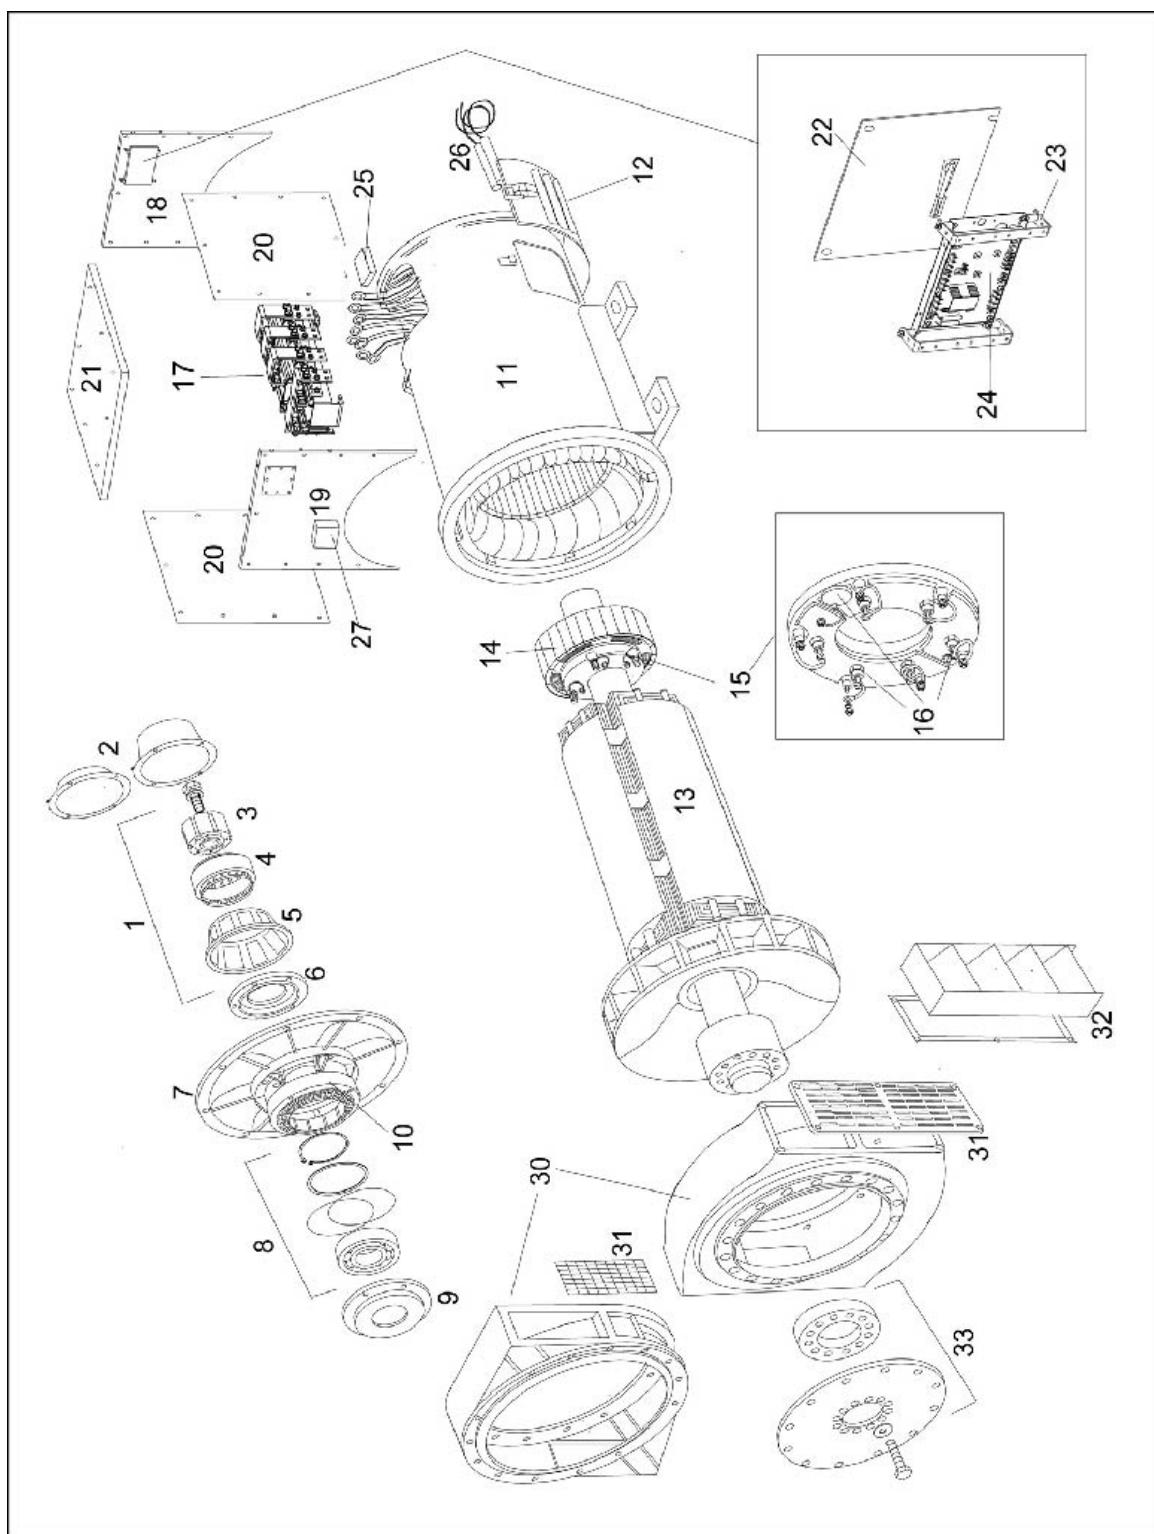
HC5 SINGLE BEARING ALTERNATOR
